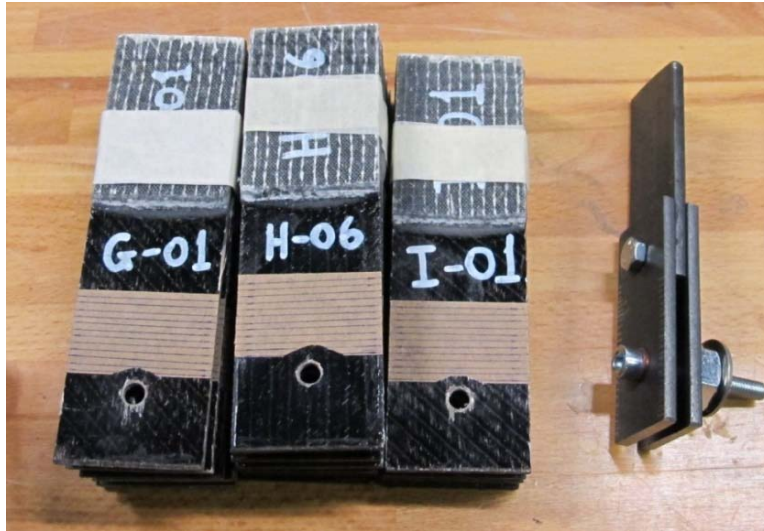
The specimens in types G,H and I with the steel fixture.
